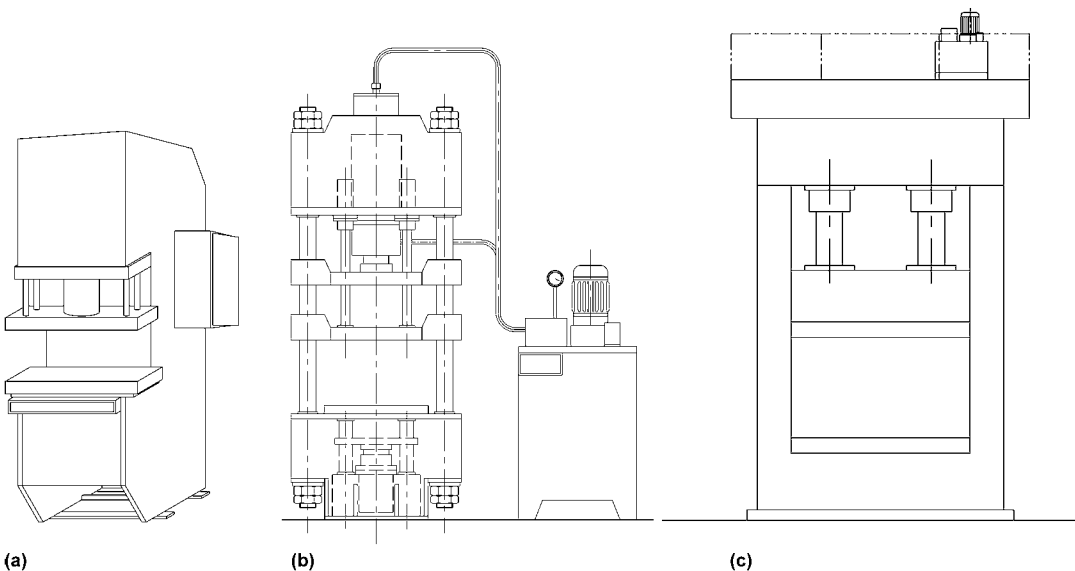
Hydraulic press frames: (a) gap frame, (b) column type, and (c) straight side. Source: Ref 12.14
